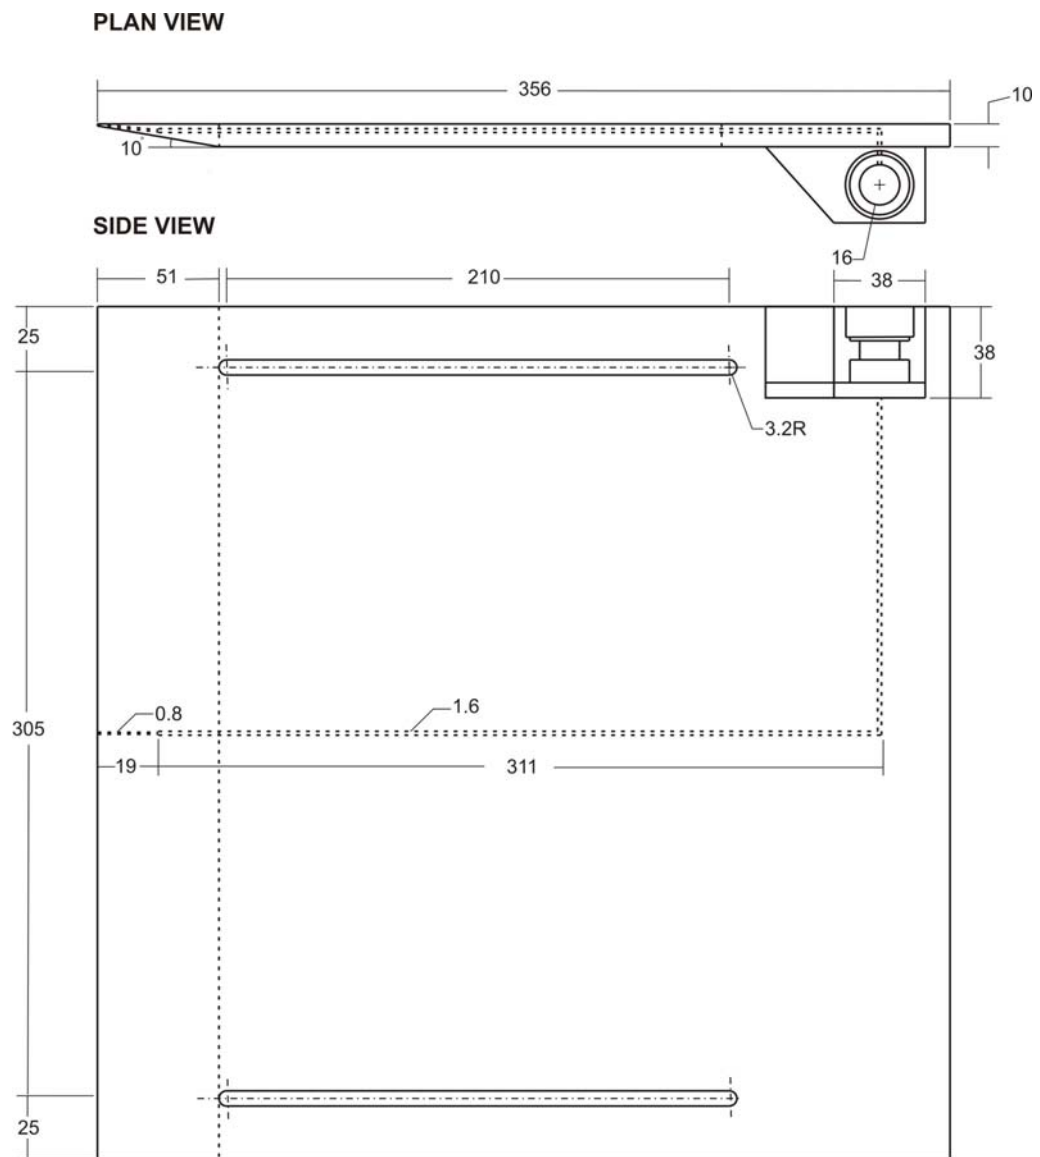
Close-up of impingement plate showing pressure tap, transmission line, and transducer housing system. (All dimensions are in mm.)
